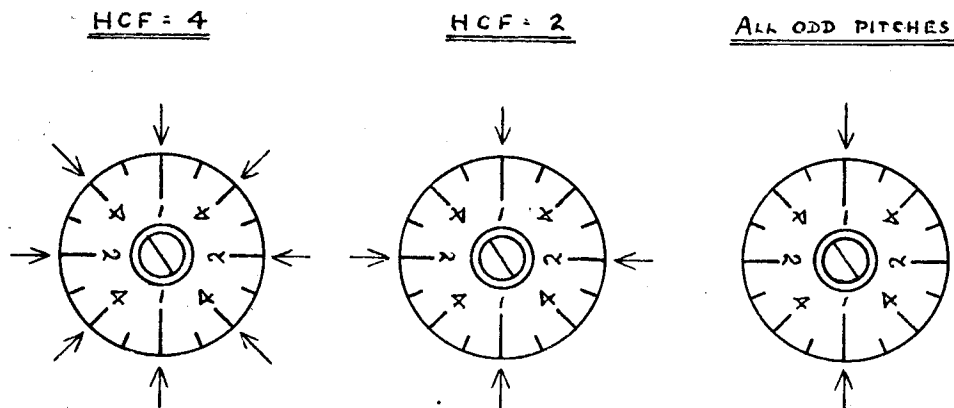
Positions for engaging leadscrew when cutting single threads with the new indicator
